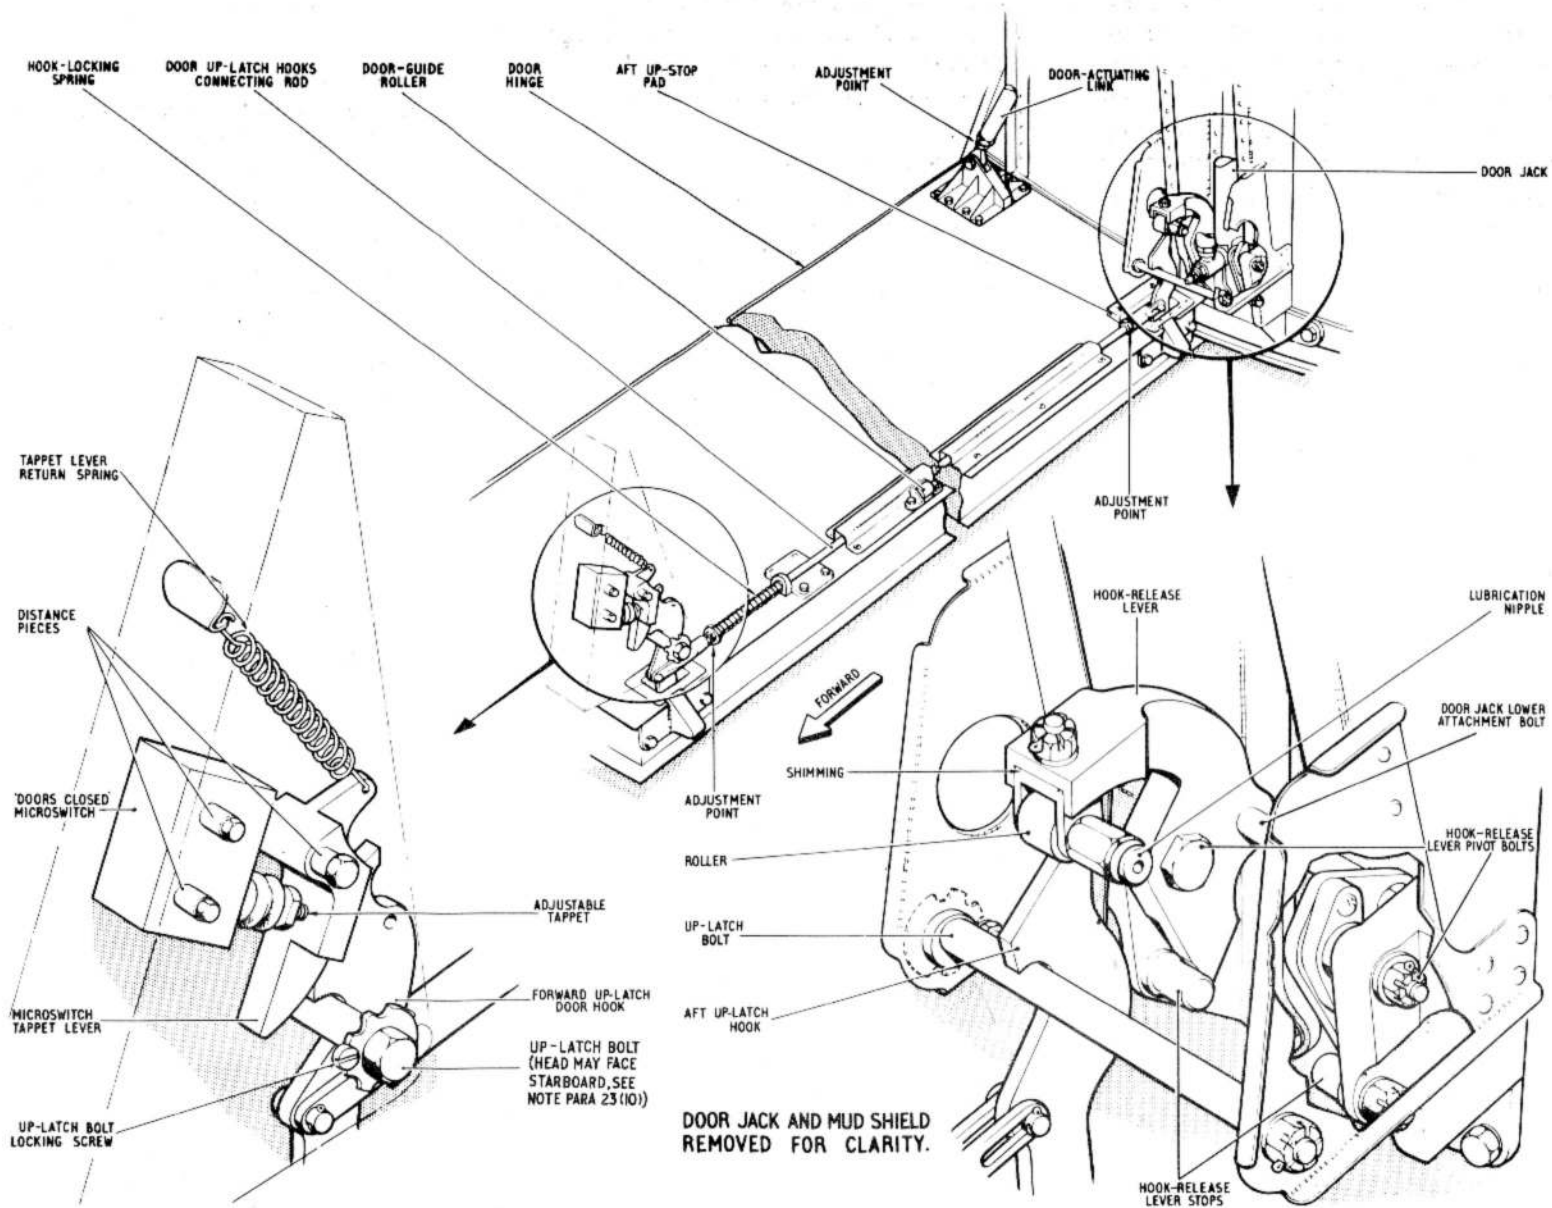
STARBOARD DOOR LOCKING MECHANISM
